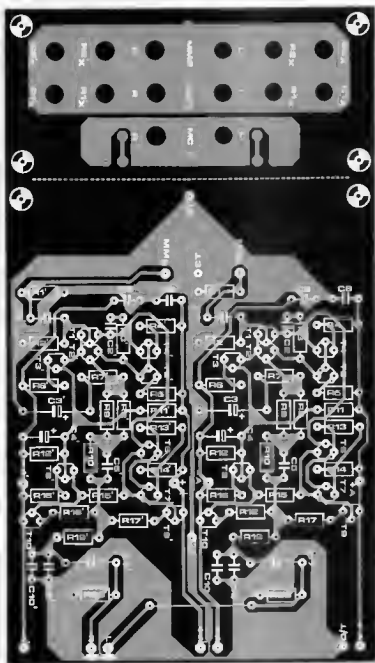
The p.c. board for the moving magnet preamp and that for the cinch input sockets. These boards must be separated before mounting any components.
